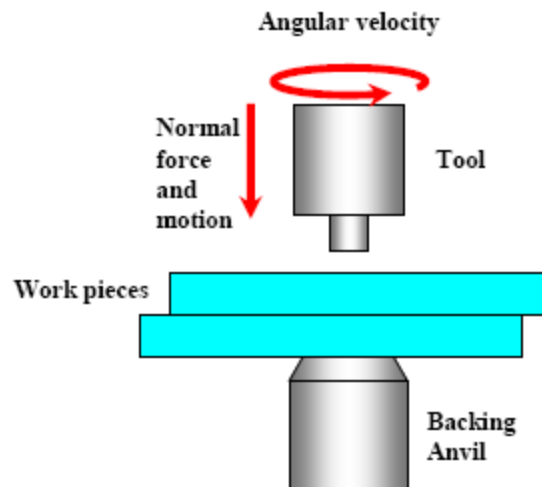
Schematic of a friction stir spot welding process [4]
